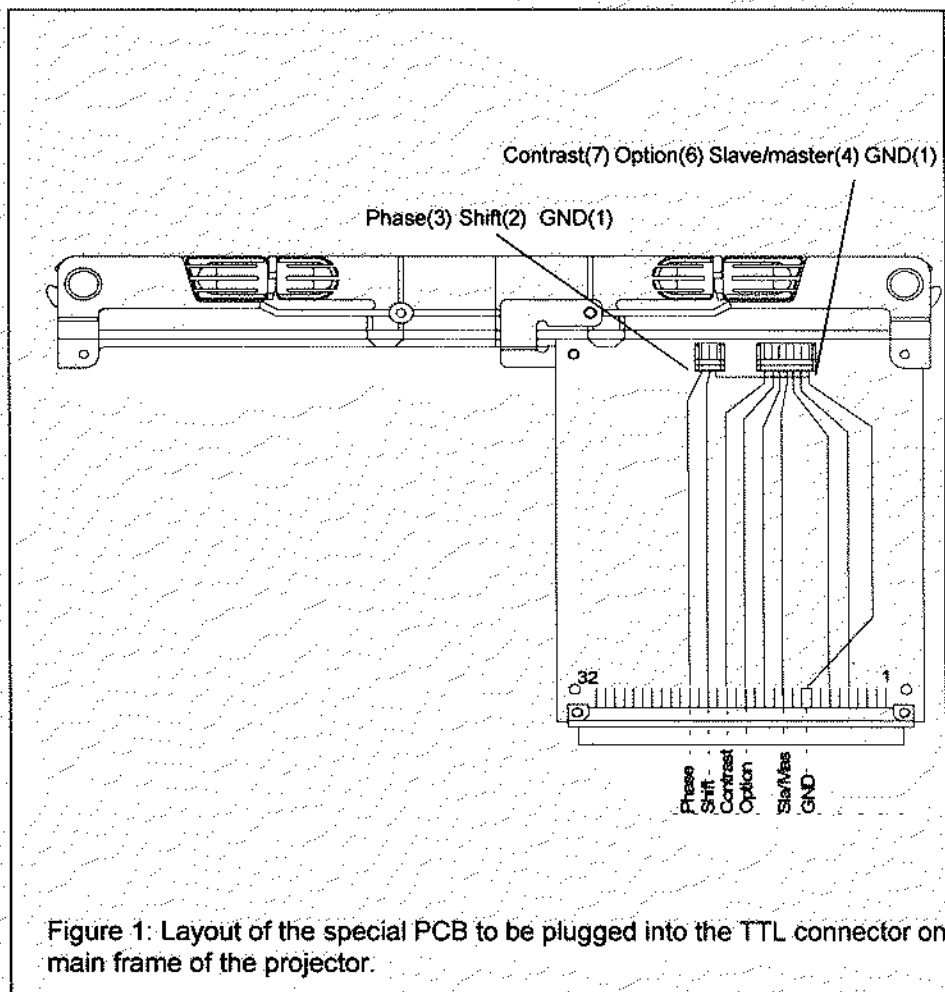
Layout of the special PCB to be plugged into the TTL connector on main frame of the projector.
